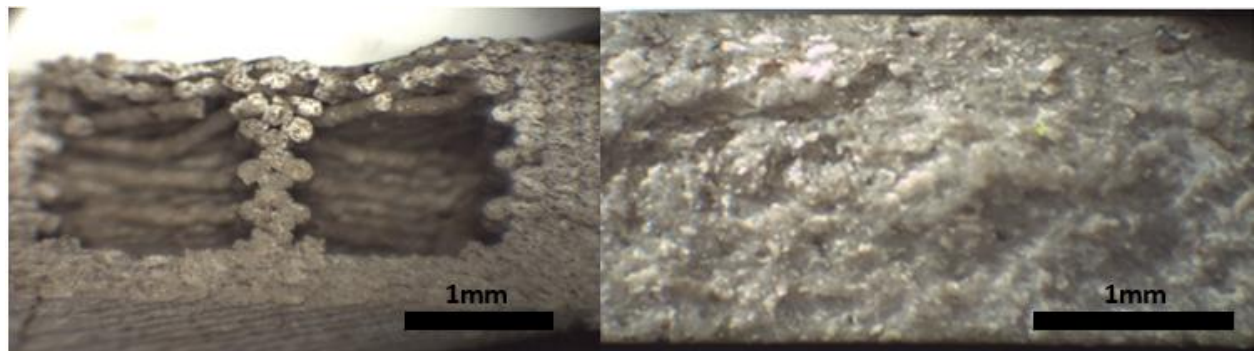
Fractographies of Timberfill specimens. A) 25 % infill printed. B) Injection-molded
